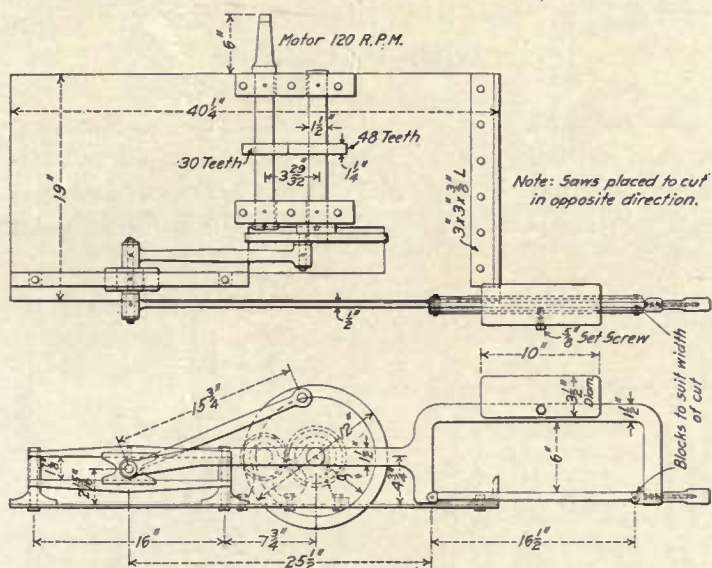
Portable Hack Saw Driven by an Air Motor.
